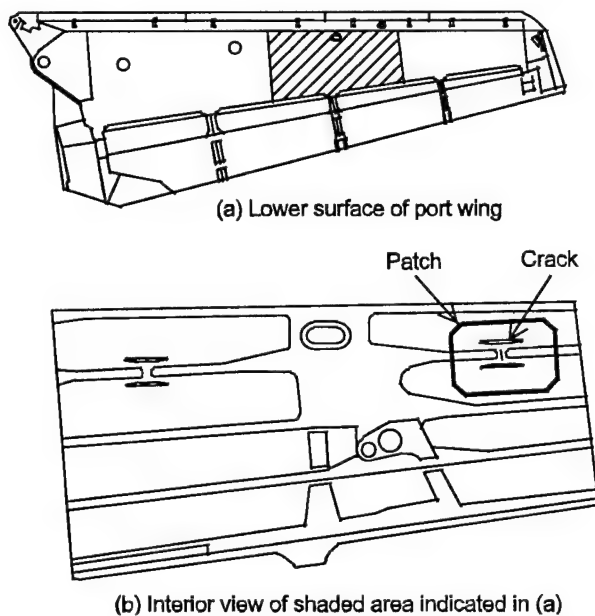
Details of the location of a 45-mm fatigue crack in the F 111 lower wing-skin, at FASS 281 with an outline of the repair patch, which is made of 14 ply b/ep ($0_2, \pm 45, 0_3$)_S bonded with adhesive. Patch dimensions are approximately 500 mm spanwise \times 350 mm chordwise.
